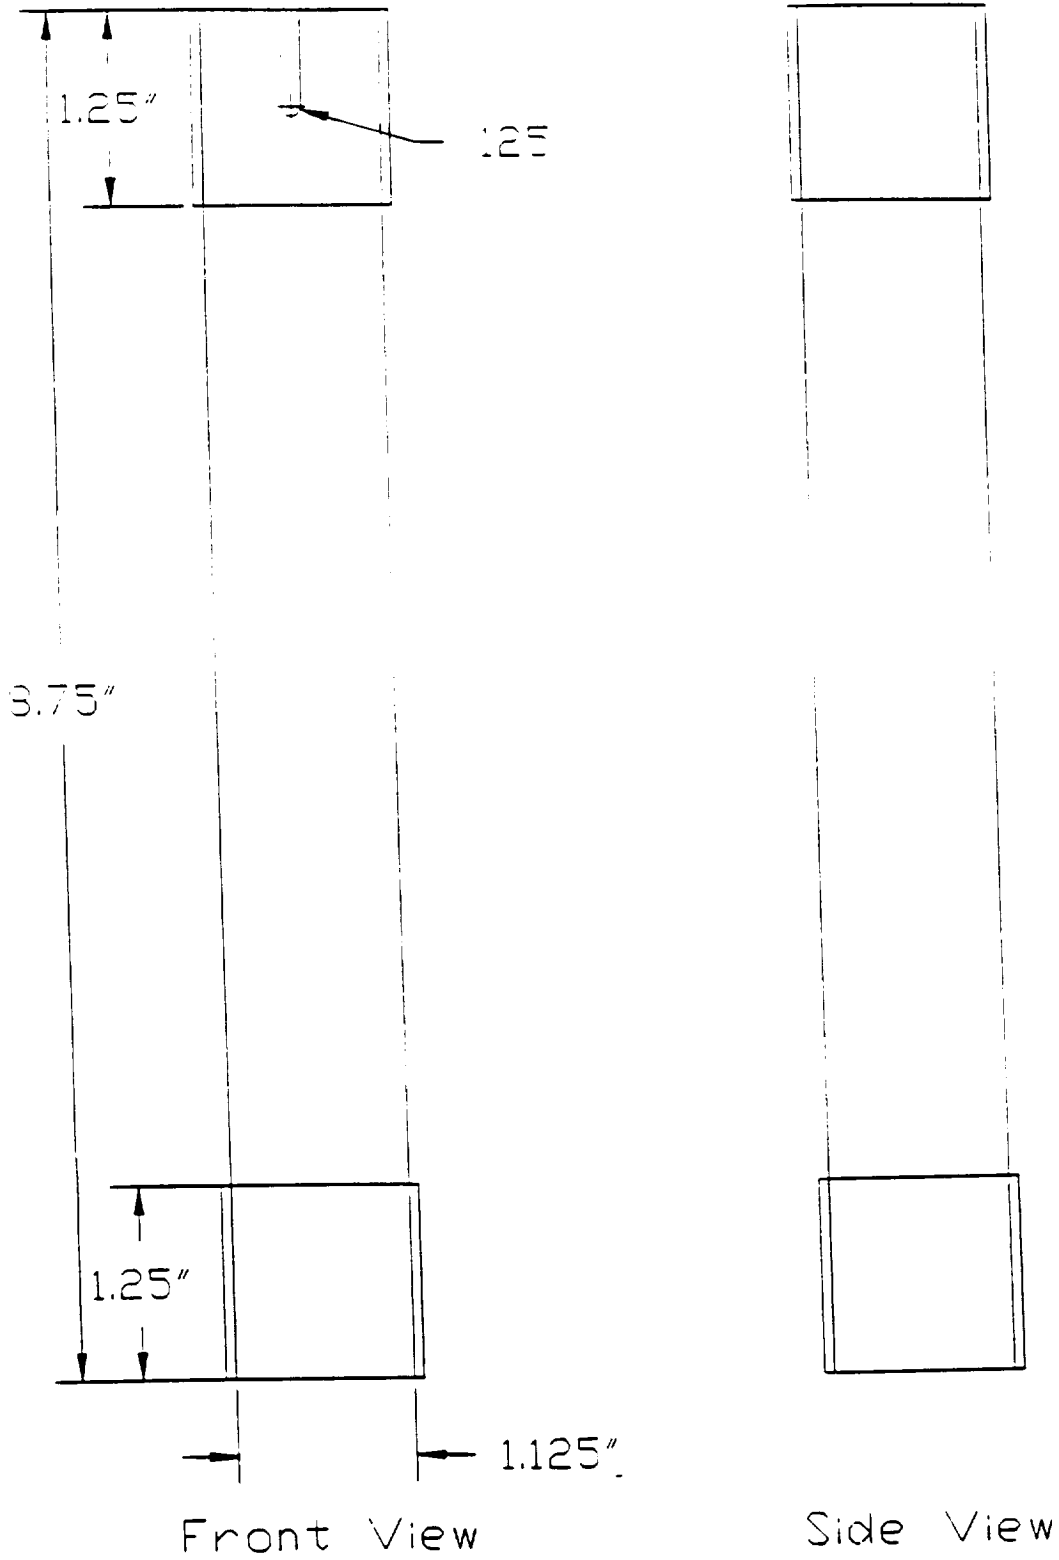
Magnetic Winding Coil Form: Front and Side View
